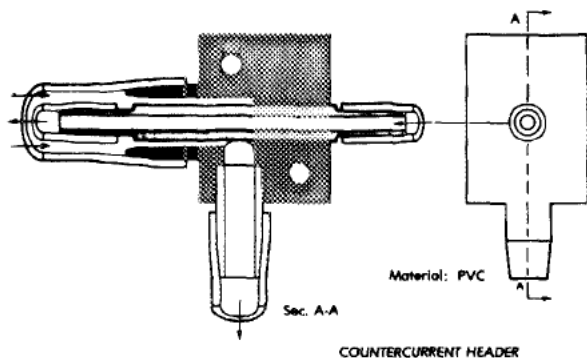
Design drawing of a header for the counter-current heat exchanger.
